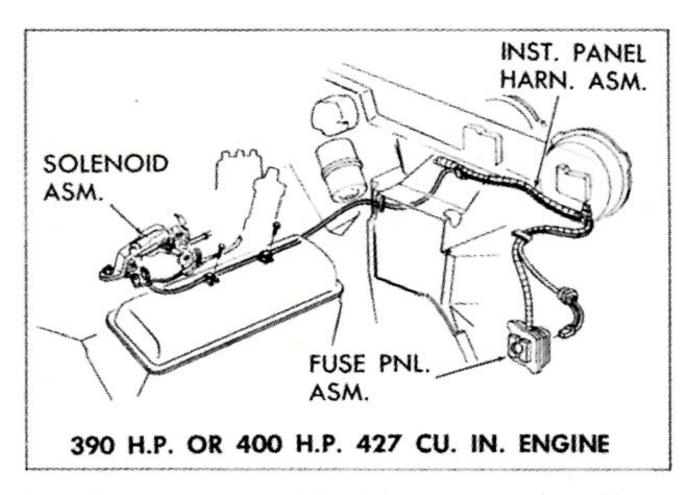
illustrates proper solenoid installation on both the 390 and 400 H.P. versions of the 427 cu. in. engine and also illustrates the correct intake manifold vacuum fittings for the full manifold vacuum distributor advance arrangement.
